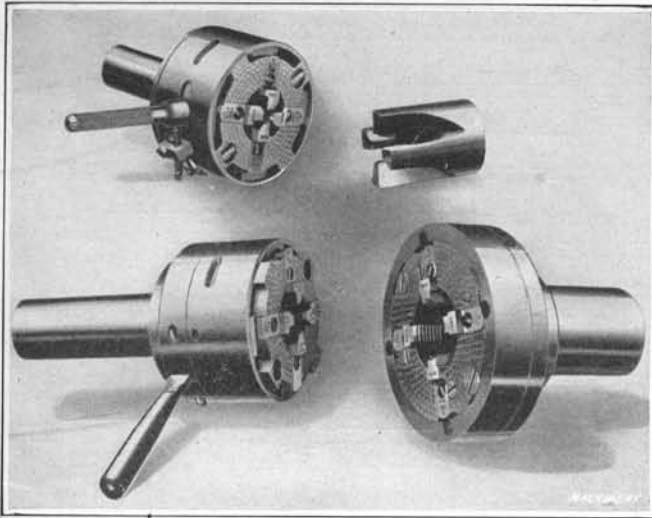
Automatic Opening Dies, Adjustable Chaser Die and Spring Screw Die used on Gridley Automatic Turret Lathes
